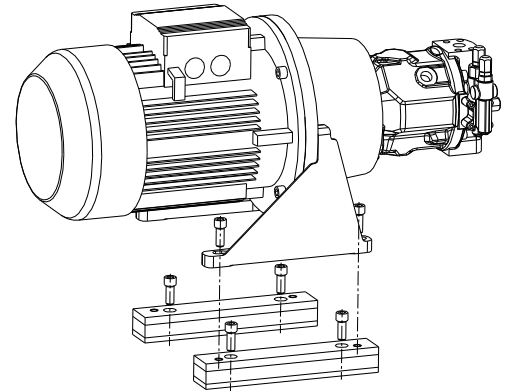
Assembly of damping rods DSFS with foot flange PTFS
